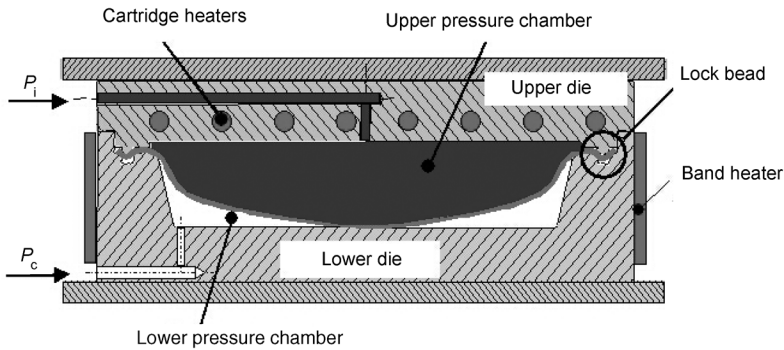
Tool setup for pneumatic forming tooling developed at the Institute for Metal Forming Technology at the University of Stuttgart. Source: Ref 5.34
